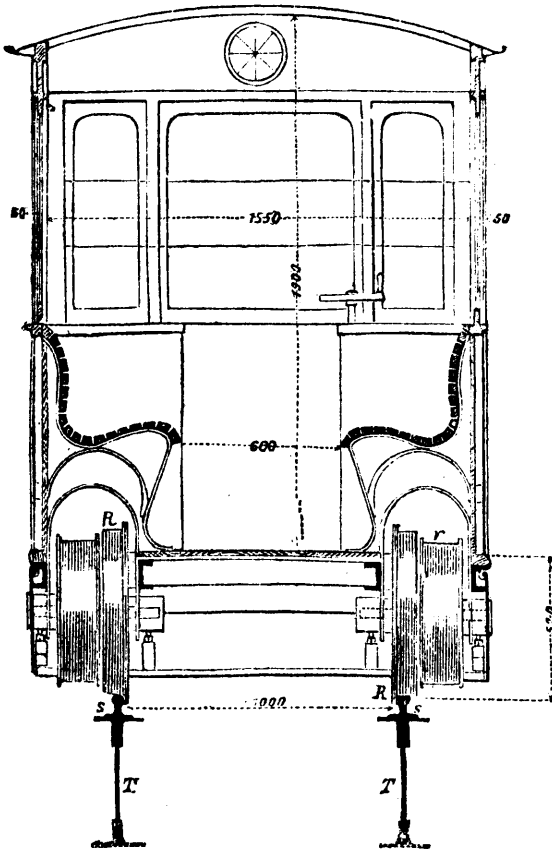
SIEMEN'S ELECTRICAL ELEVATED RAILWAY
